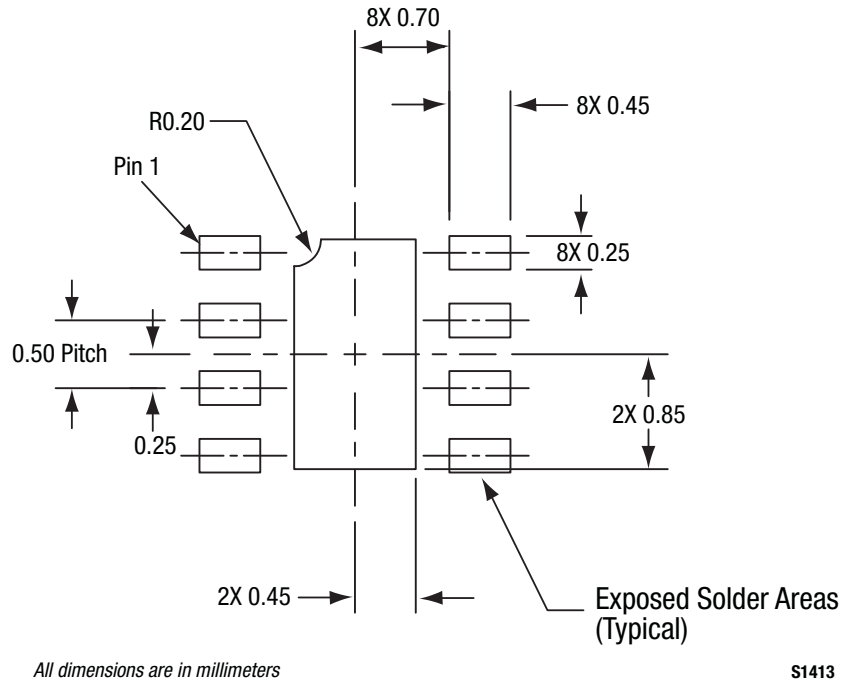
SKY67023-396LF PCB Layout Footprint (Top View)
